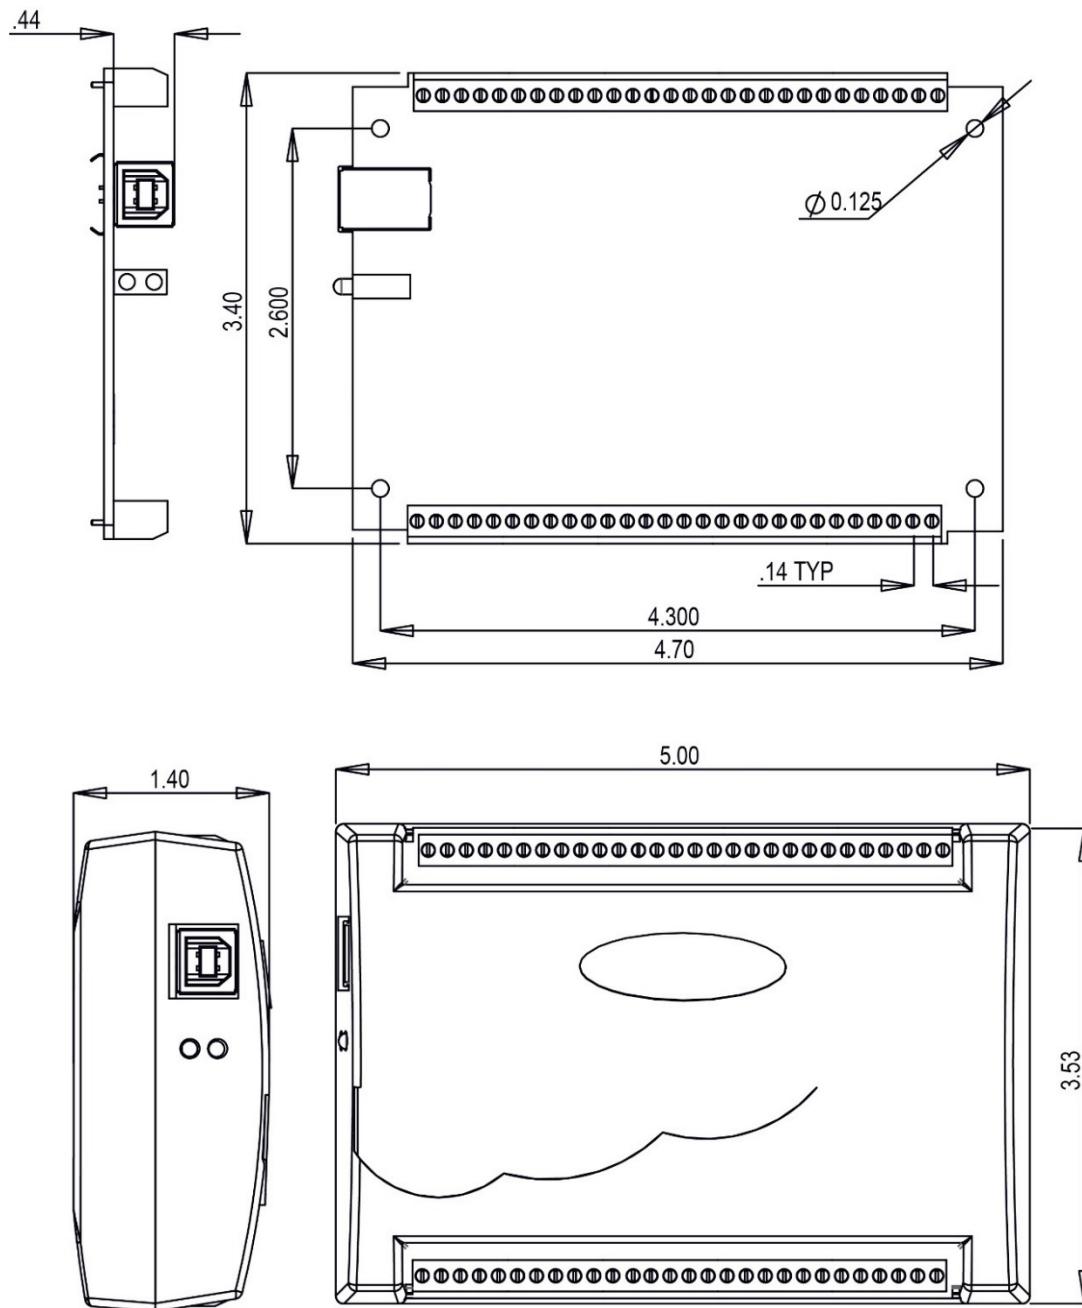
RedLab 1808X circuit board (top) and enclosure dimensions
